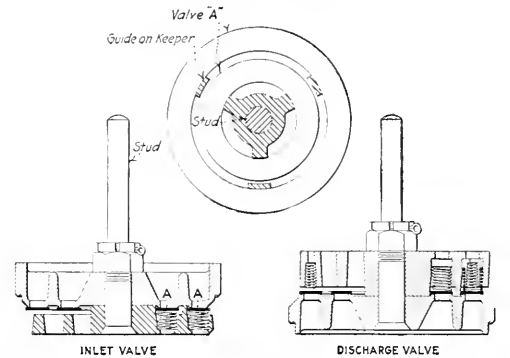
THE "SIMPLAT" VALVE (CHICAGO PNEUMATIC TOOL CO.)
